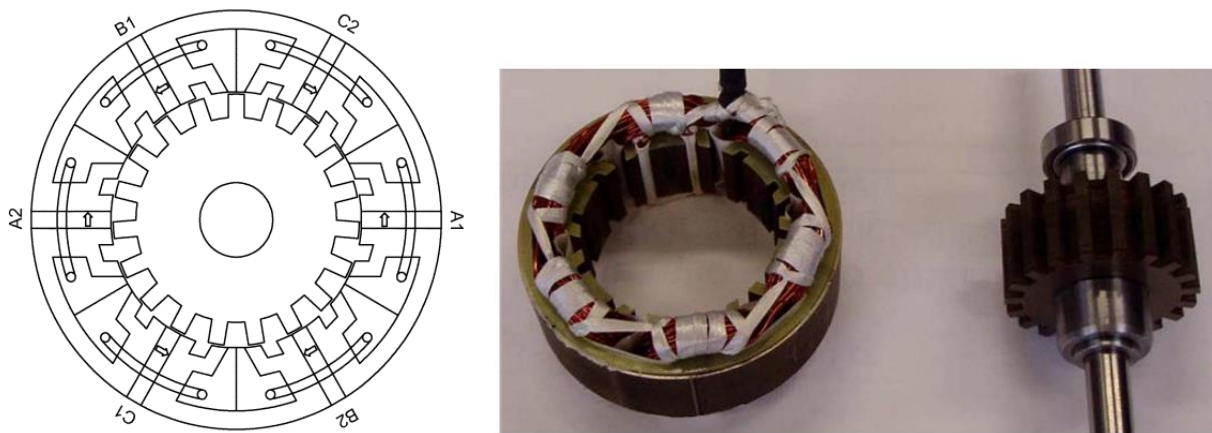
Multi-tooth flux-switching PM machine and one prototype [122].
